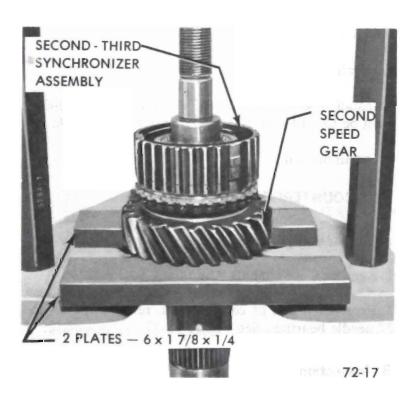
Removing Second-Third Speed Synchronizer Assembly
